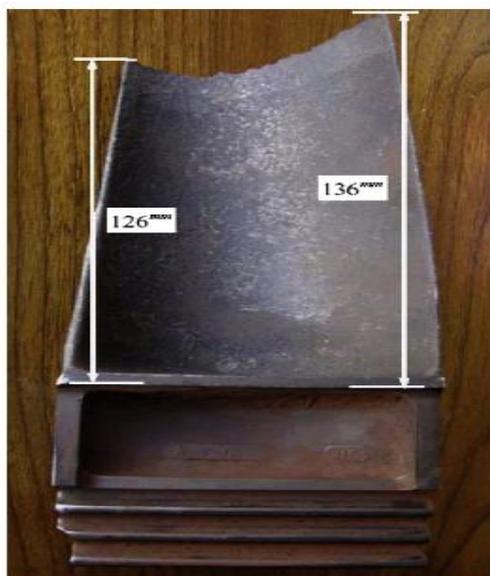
The distance of the fracture surface from the platform at blade edges.
